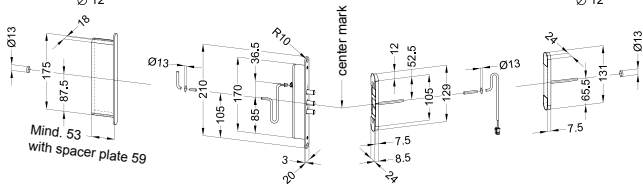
Dimensions for sash-part tappet contact with face plate F20 and frame part with covers
